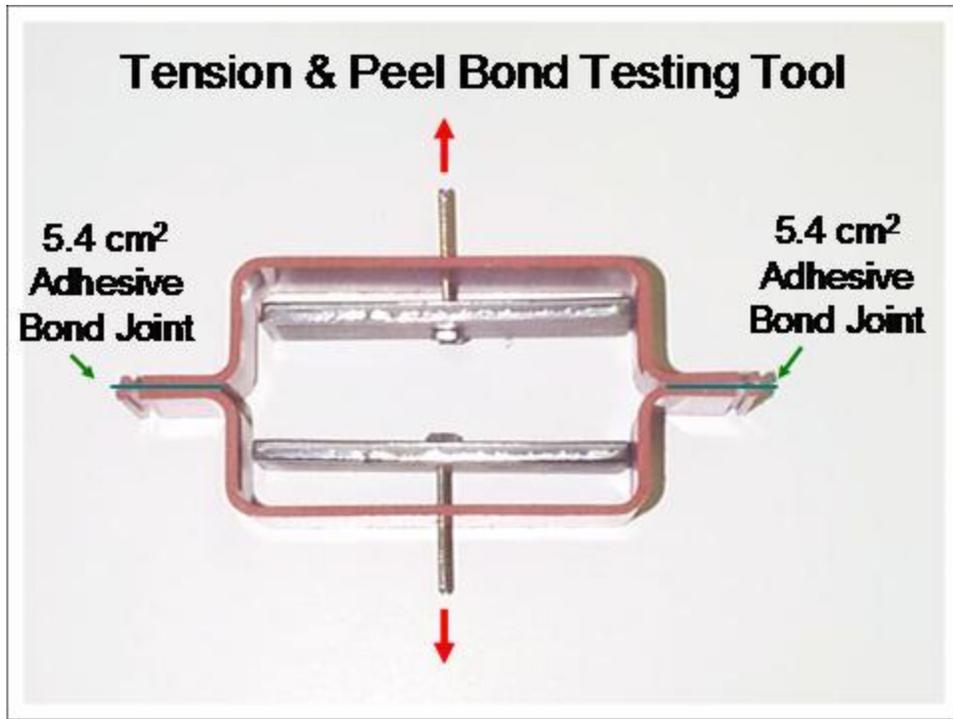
Tool and specimen for testing bonds in box sections by tension-peel loading.
